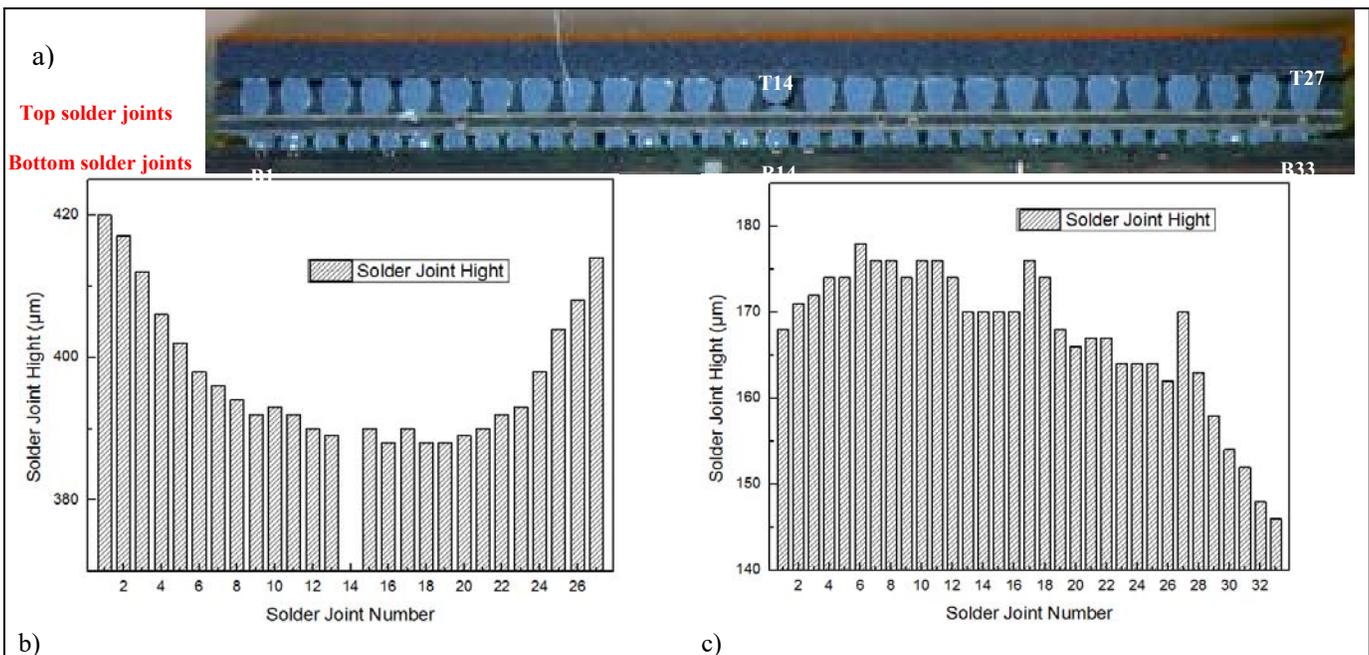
Representative Cross-sectional View of PoP Solder Joints and the Measured Height Data
